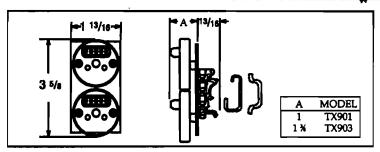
TX90-DIN DIN Rail Mounting Adapter (Dimensions in Inches)
